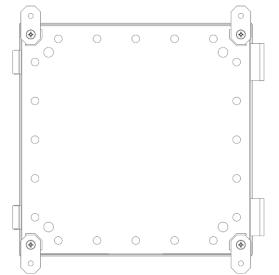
Rear view of the enclosure with mounting brackets mounted vertically
